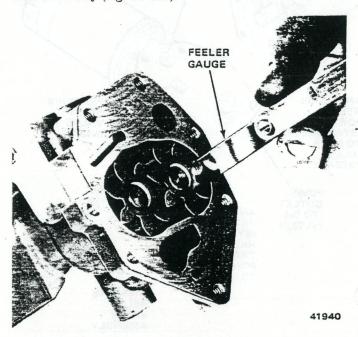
B-129 Gear Tooth-to-Body Clearance Measurement
